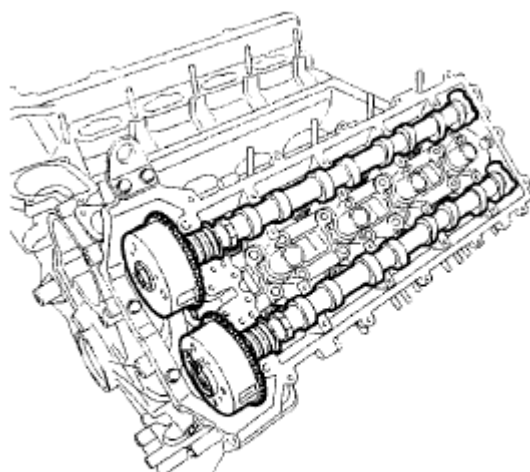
Identifying Camshaft Bearing Caps And Camshaft Thrust Bearing Cap Bolts
